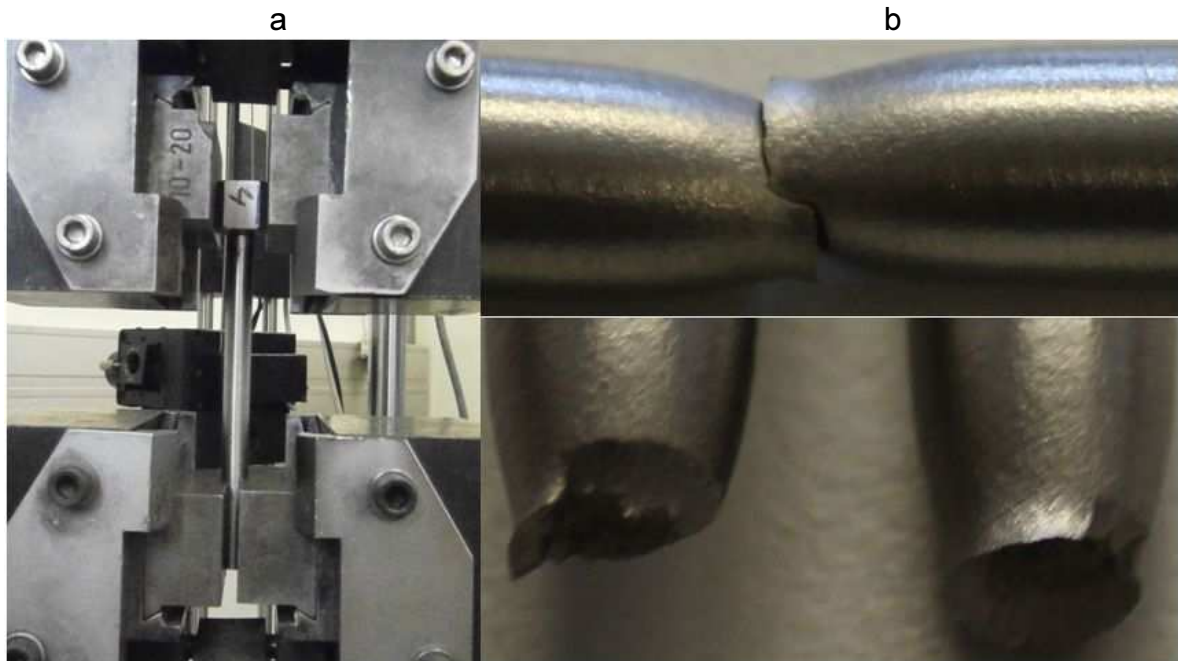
a) Sample A10.2 mounted in the clamps, b) magnified fracture zone
